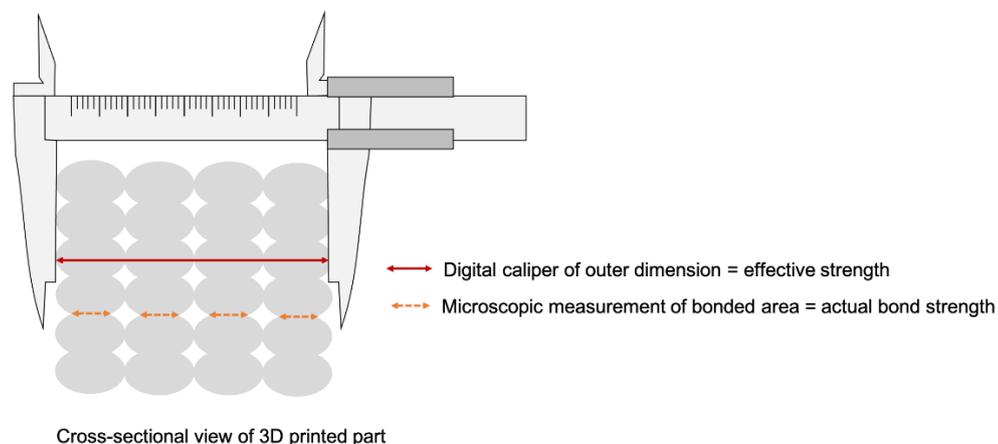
Schematic of caliper measurement method for a 3D-printed part. This method measures the outer dimension, discounting the narrowing caused by inherent internal and surface void geometries, thus overestimating the load-bearing area, as shown by colour-coded arrows.
